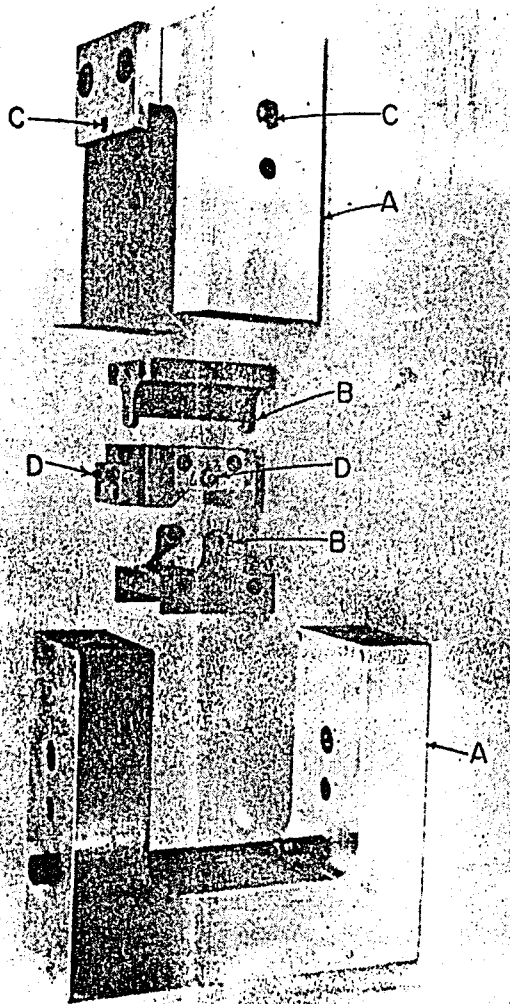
Exploded view of crossed-knife edges and yokes. (7)
